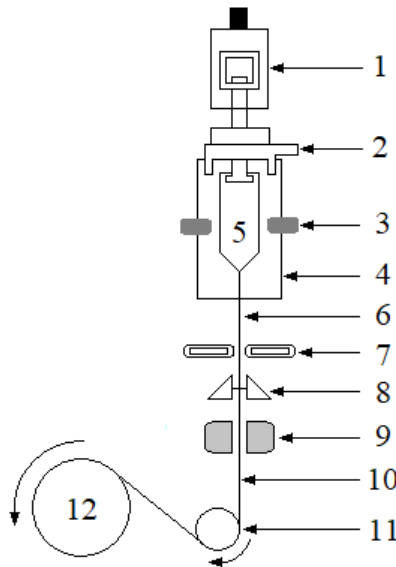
22. Scheme of a drawing tower. 1: preform descent; 2: inert flux input; 3: ring furnace heater; 4: insulation air chamber protection; 5: specimen rod; 6: necked fibre; 7: diameter measurement; 8: polymer coating; 9: polymer heater; 10: coated fibre; 11: tension-meter; 12: drum
